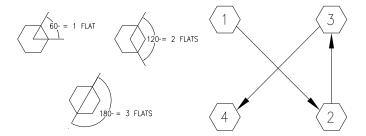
Rotation Angle (Each Flat = 60°) Use progressive tightening technique to draw side rods up evenly.
